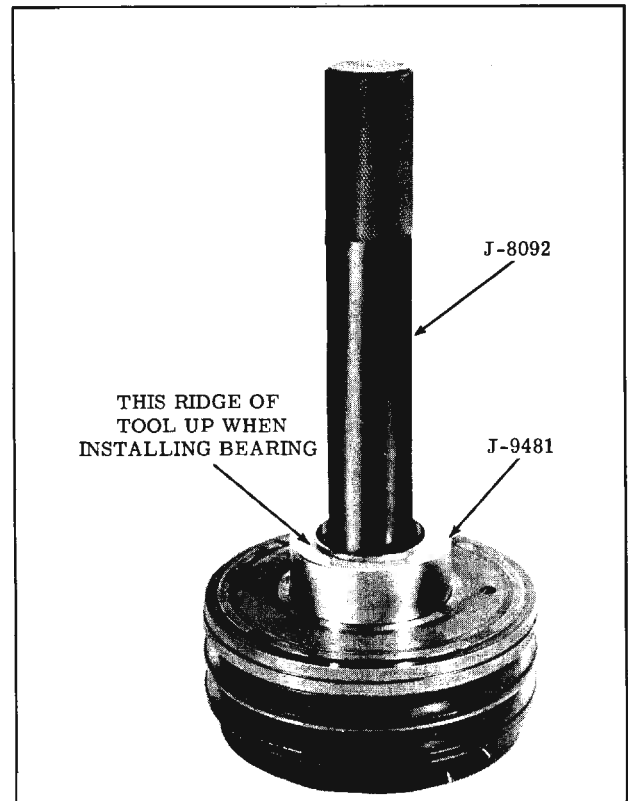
Installing Pulley and Drive Plate Bearing
